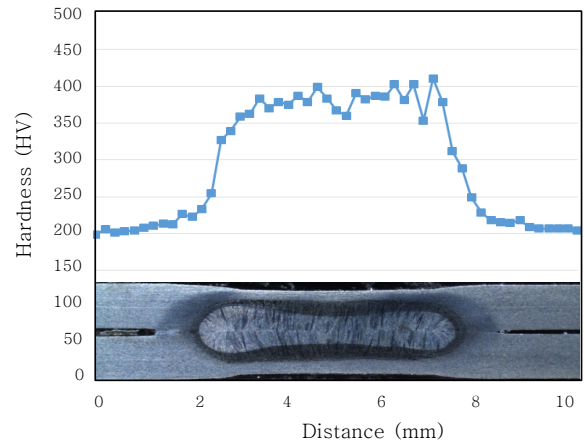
Analysis of hardness profile of weld nugget
